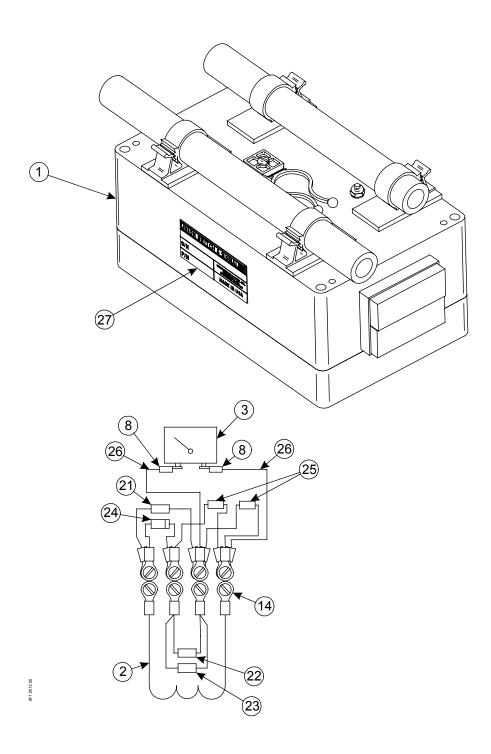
Antenna Test Box Parts (Sheet 1)
